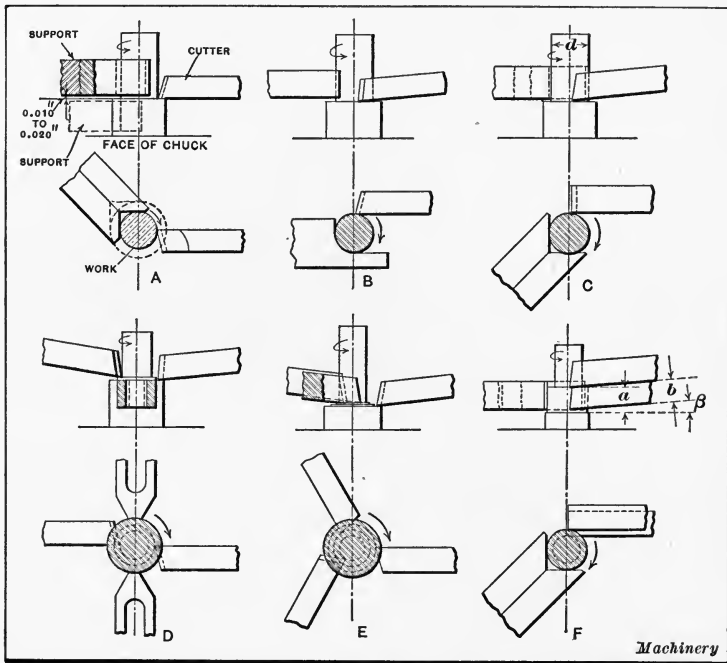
Various Methods of Applying Box-tool Cutters to the Work
